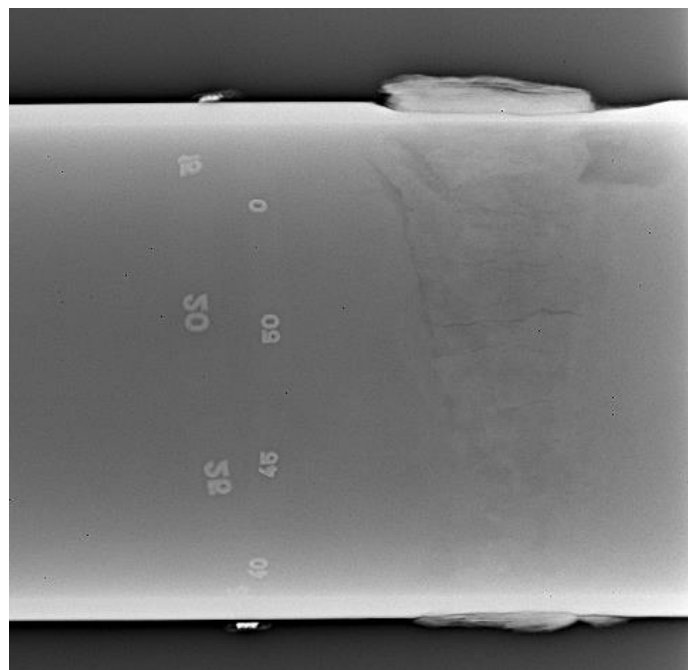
DR image of the scab section of specimen H168, close to the angle showing the greatest wall loss/minimum remaining wall thickness. Note the lack of structure in the images of the pipe walls.
